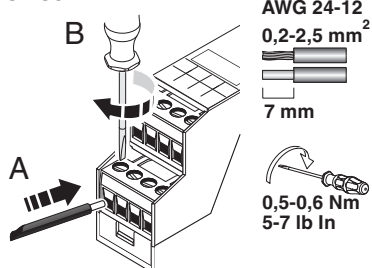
Connecting the cables for PSR-SCP-... (Screw terminal block)
